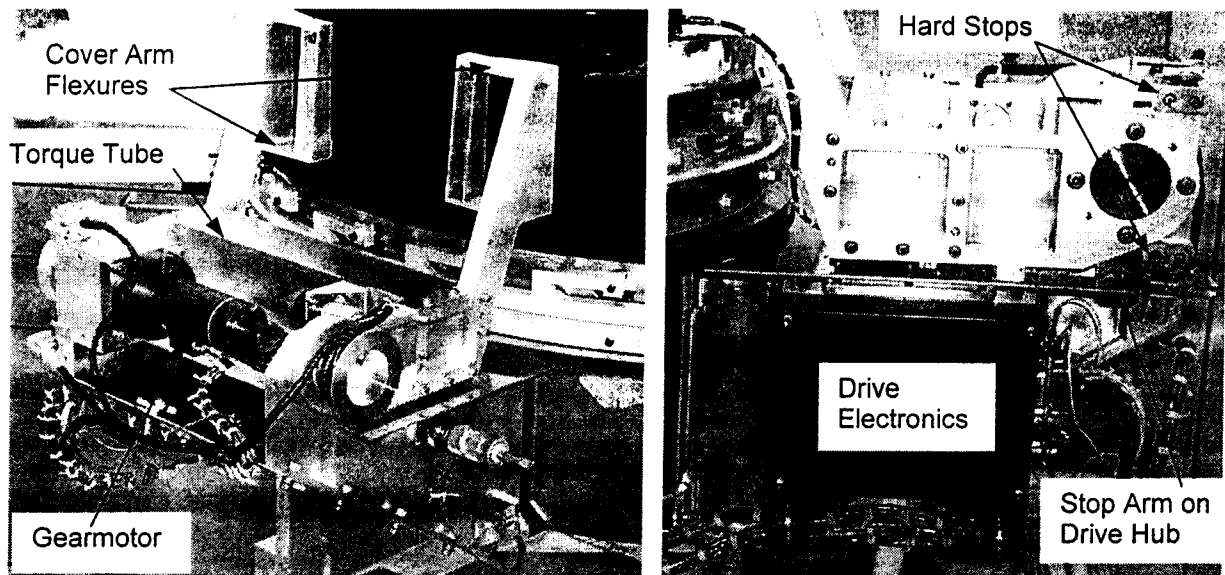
and 11b. The Cover Drive Mechanism opens and closes the canister cover.
